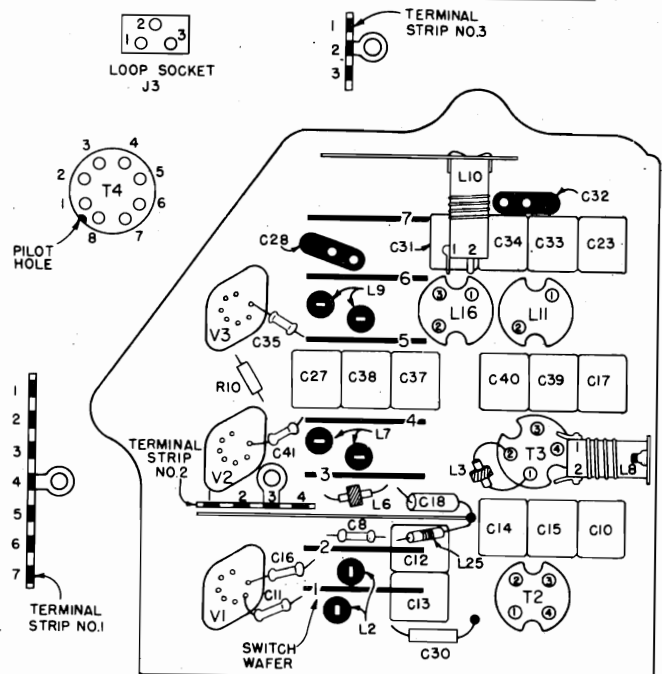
Physical Location of Components Listed in Band Switch Wiring Table
